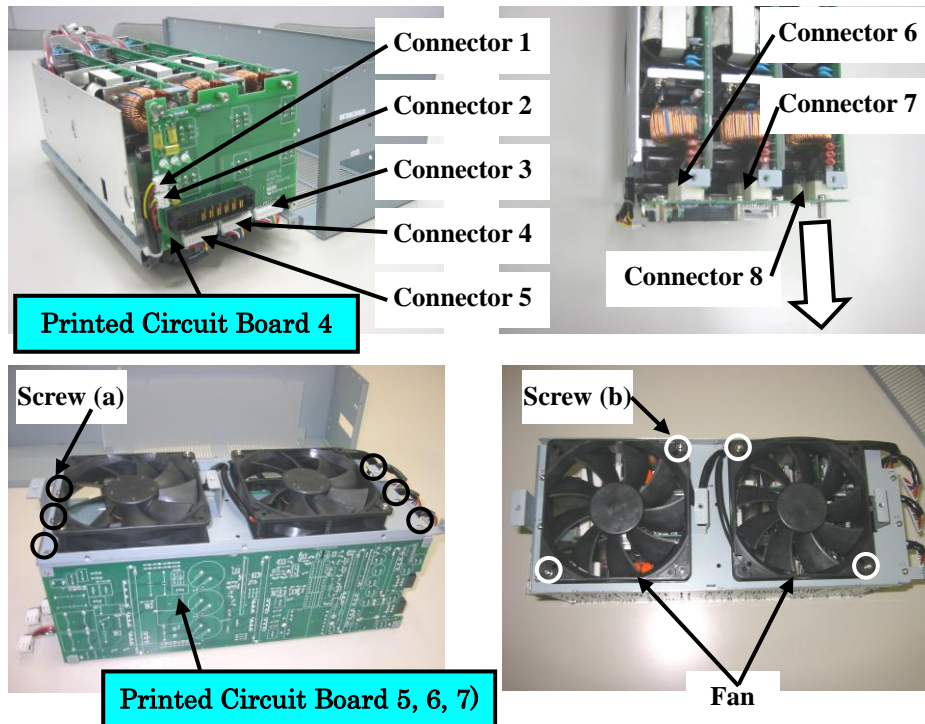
Removing PCB 4, 5, 6, 7, and the fan from PPD2960
